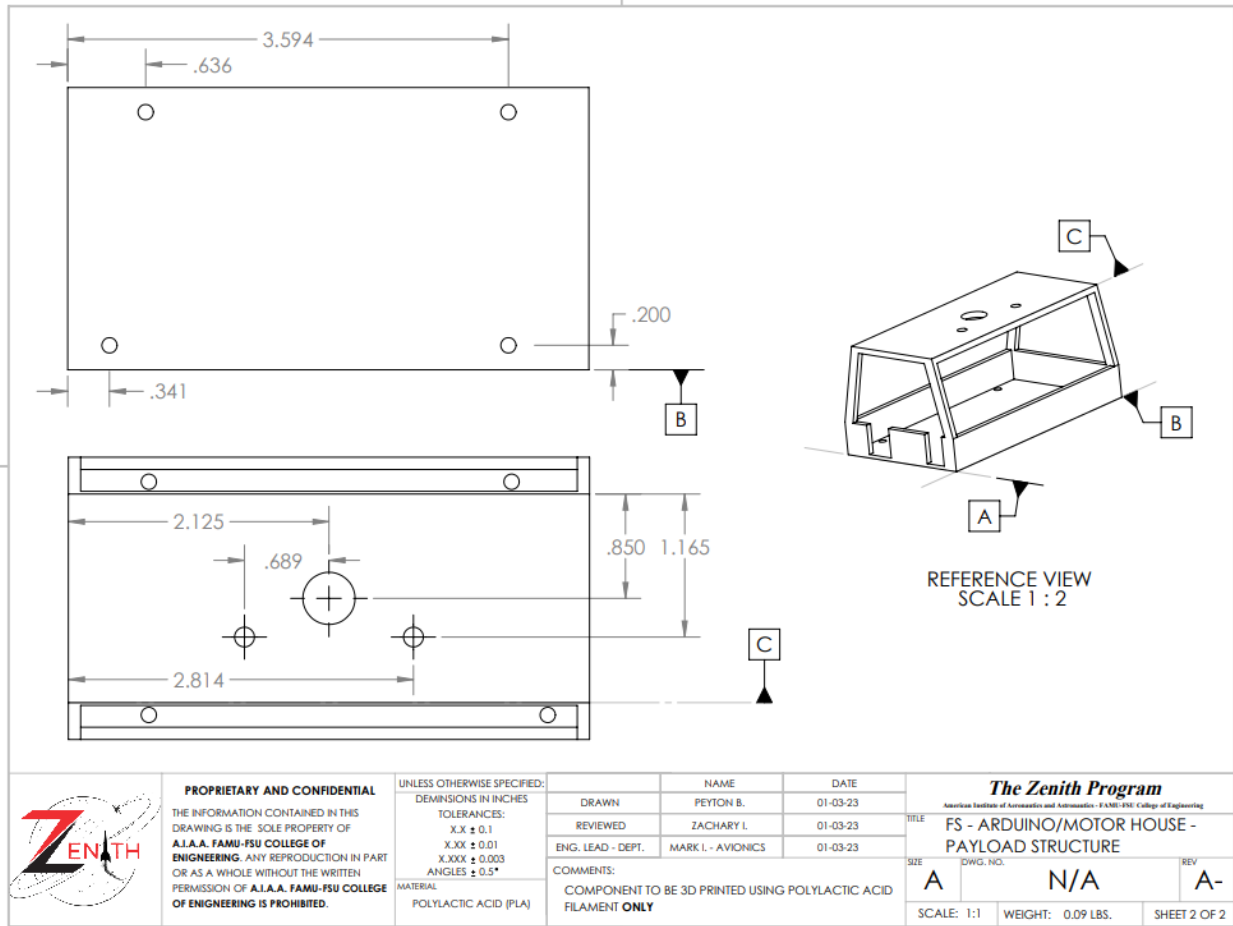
Arduino/Motor Housing Drawing (Continued)
